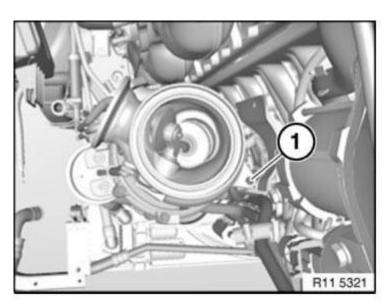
Identifying Exhaust Turbocharger Screws Courtesy of BMW OF NORTH AMERICA, INC.
